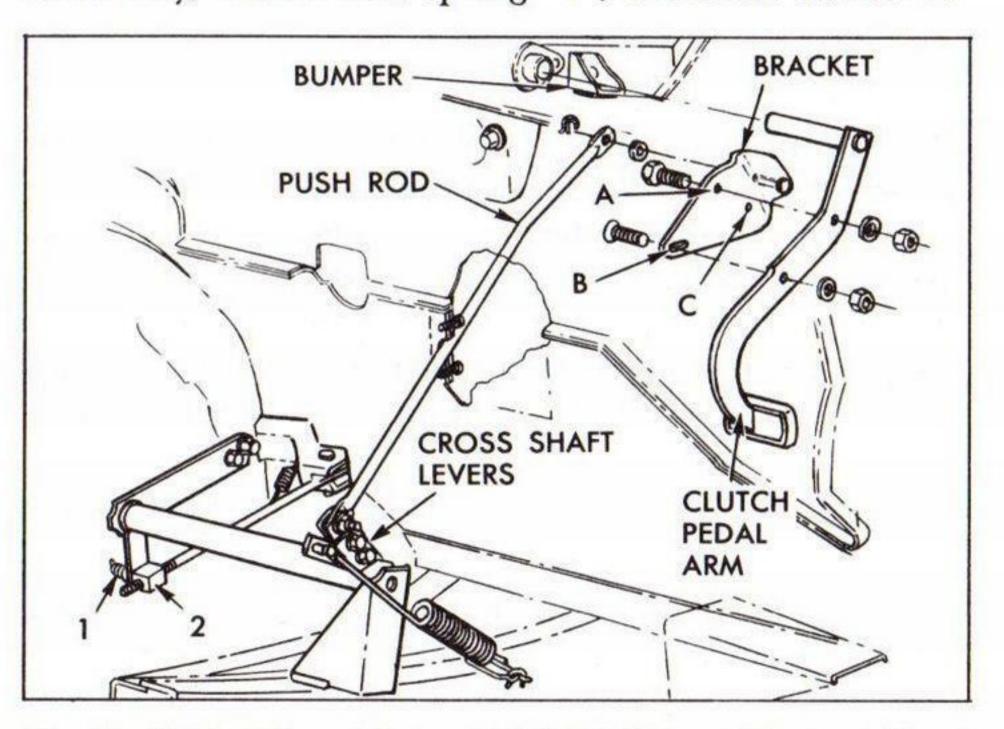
Clutch Linkage Adjustment (41/2" Pedal Travel Adjustment Shown)
